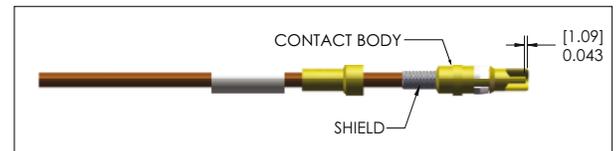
Figure C. Ensure center conductor is locked in place, then apply crimp ring.
